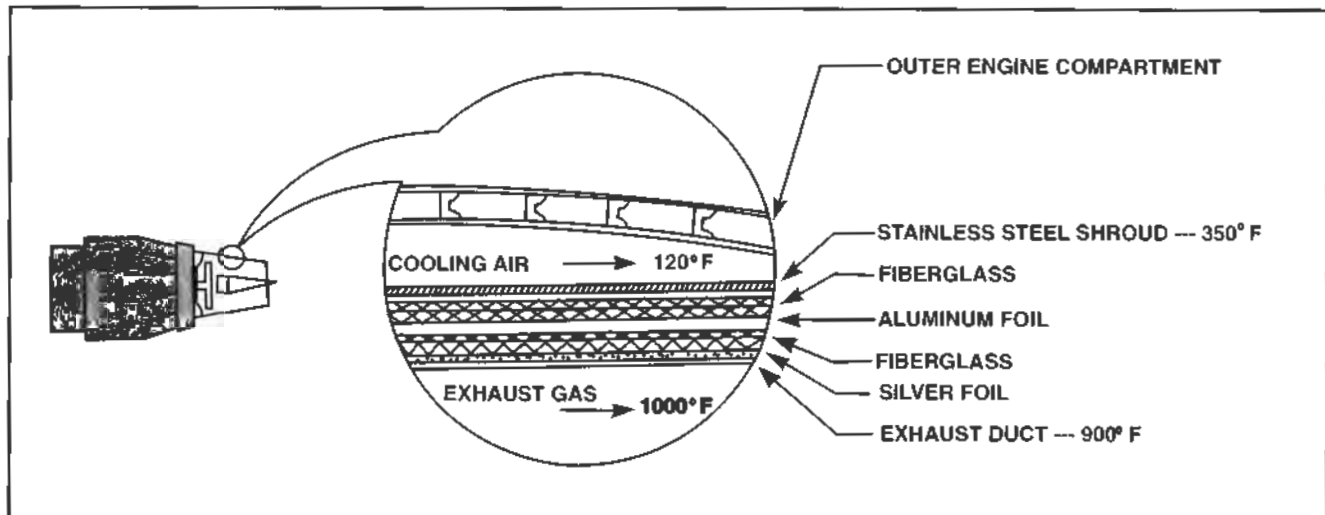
A blanket composed of metal foil, fiberglass, and a stainless steel shroud insulates the exterior of a turbine engine exhaust duct to reduce fire hazards and eliminate heat damage to adjacent structures.
